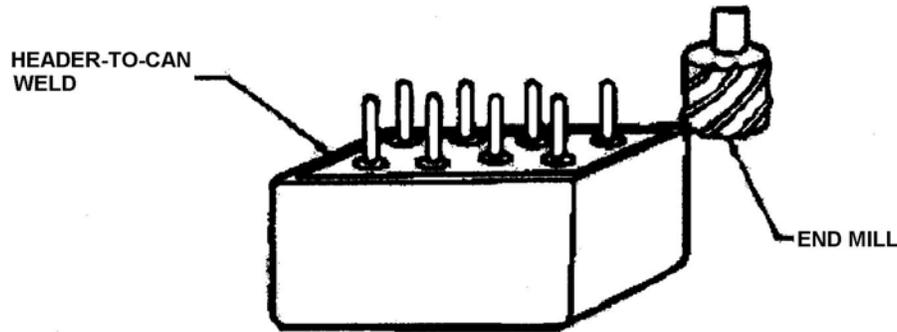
End-milling of header-to-can weld.
